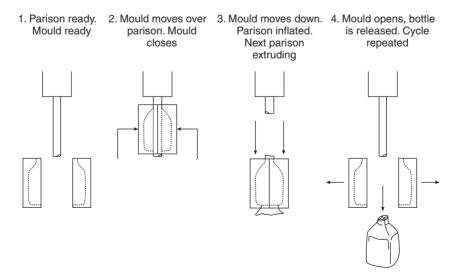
Extrusion blow moulding. (Courtesy of The Packaging Society.)
